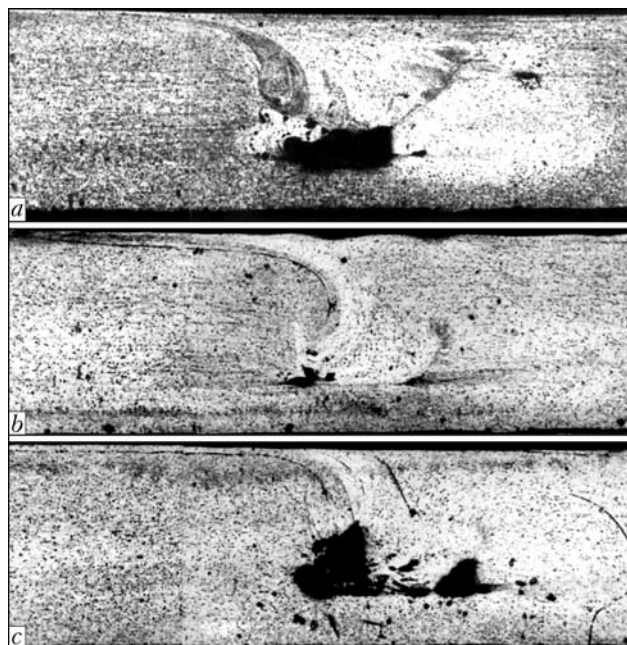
Transverse macrosections of welded joints of AMg6 alloy 2 mm thick obtained at FSW at a constant frequency of tool rotation of 2880 rpm and different welding speed: *a* – $v_w = 38$; *b* – 20; *c* – 8 m/h ($\times 20$)
